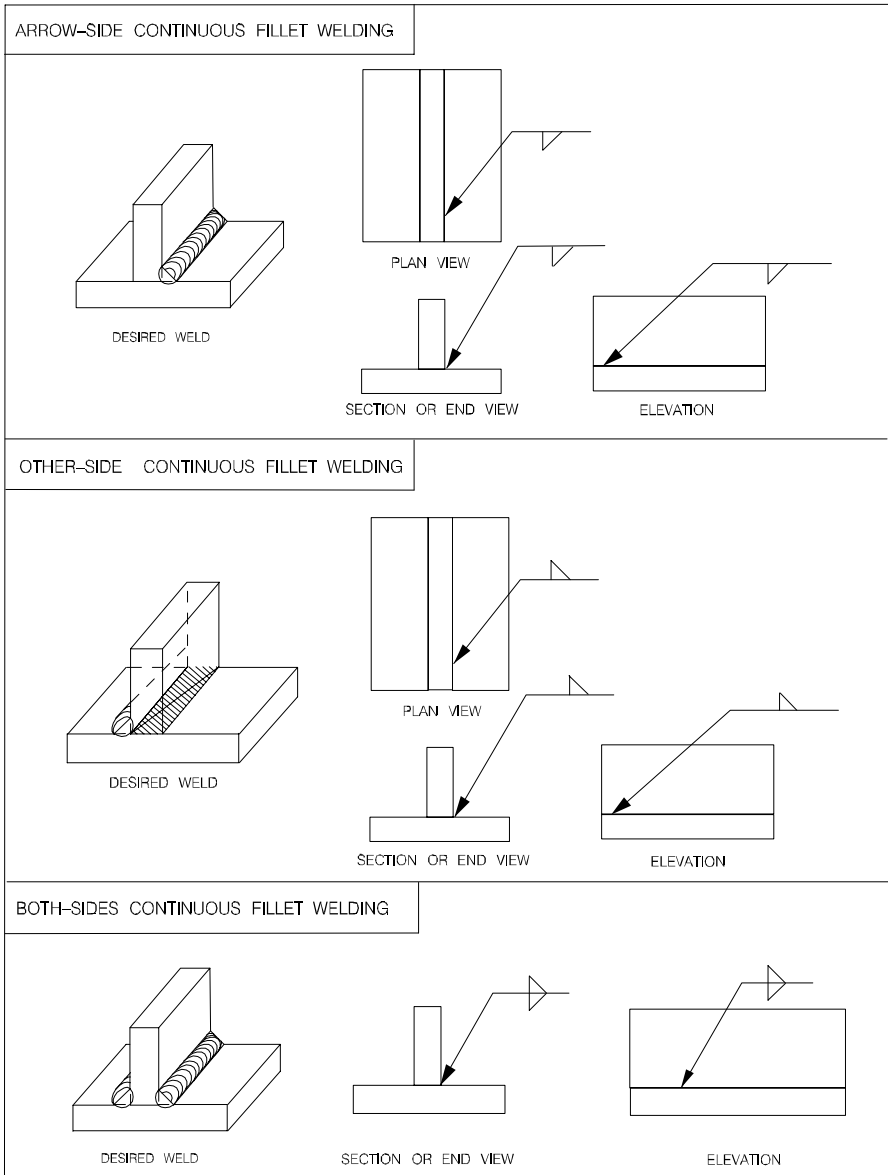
Application of Symbols – Fillet Welds – General
